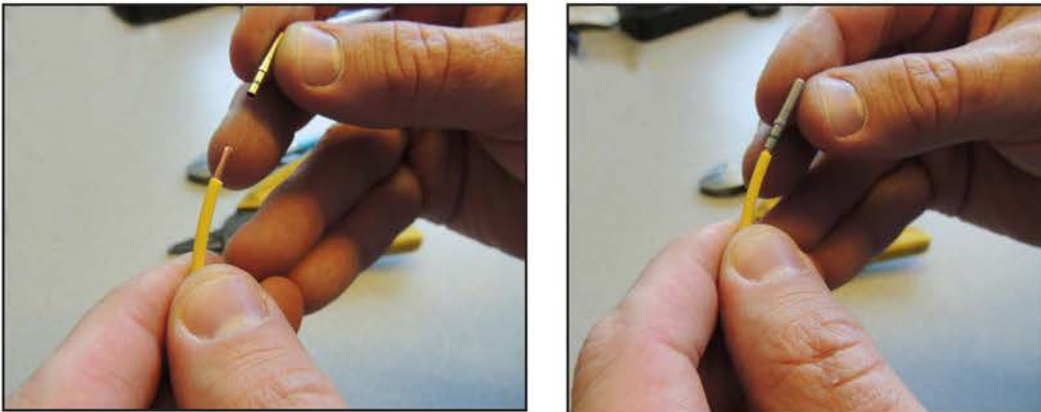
Install gold Deutsch socket onto wire. (Silver Deutsch socket shown for illustrative purposes only.)
